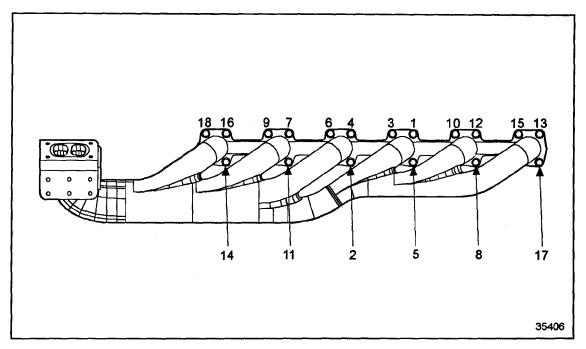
One-Piece Water-Cooled Exhaust Manifold Bolt Torque Sequence
